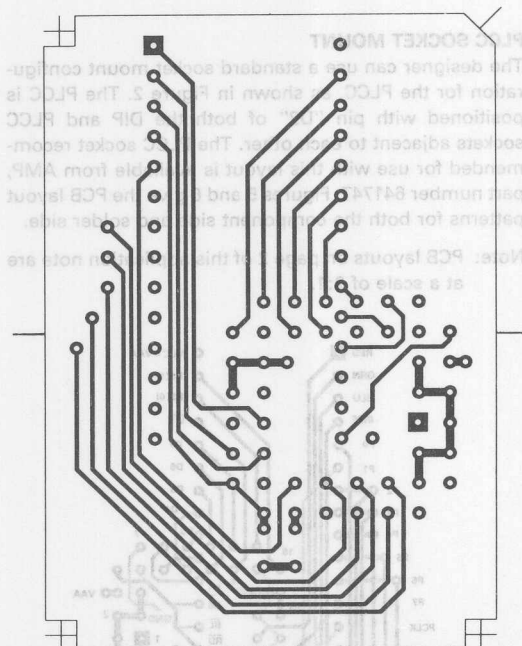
PCB Component Side Layout Pattern Using Socket Mounted PLCC
